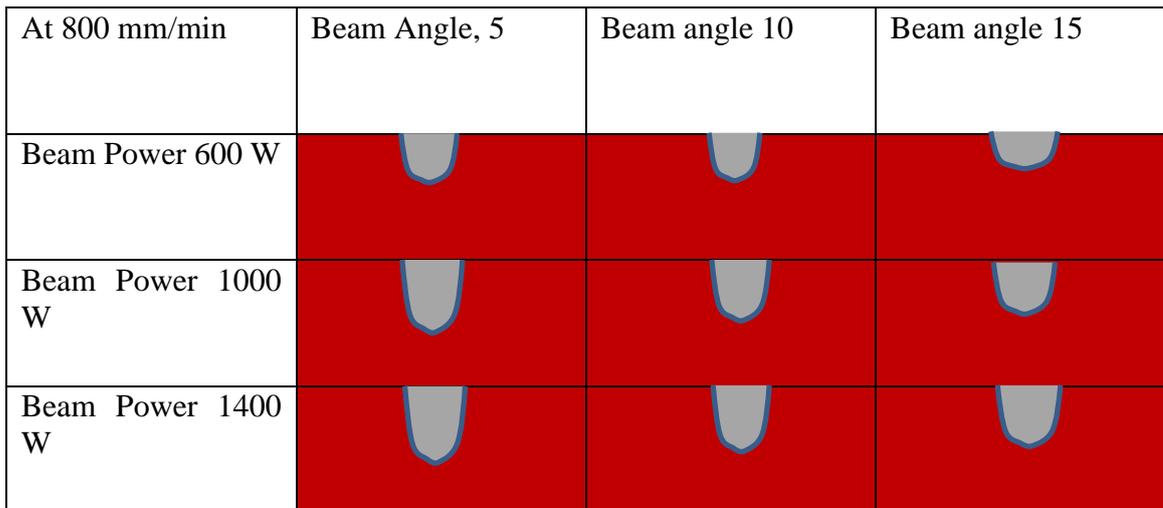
Cross section of bead at constant welding speed of 0.8 m/min [21 revised].
